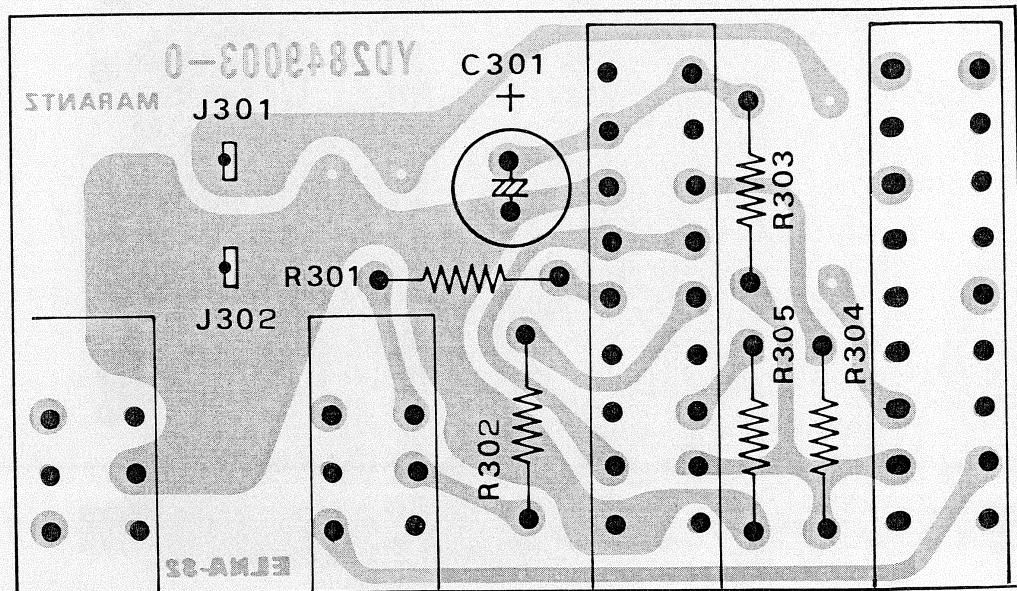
FM, AM, Mono and Muting Switch Assembly P300 Component Locations
